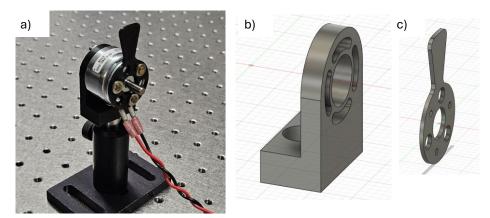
a) Picture of assembled rotary solenoid shutter, b) solenoid mount, and c) shutter blade.
